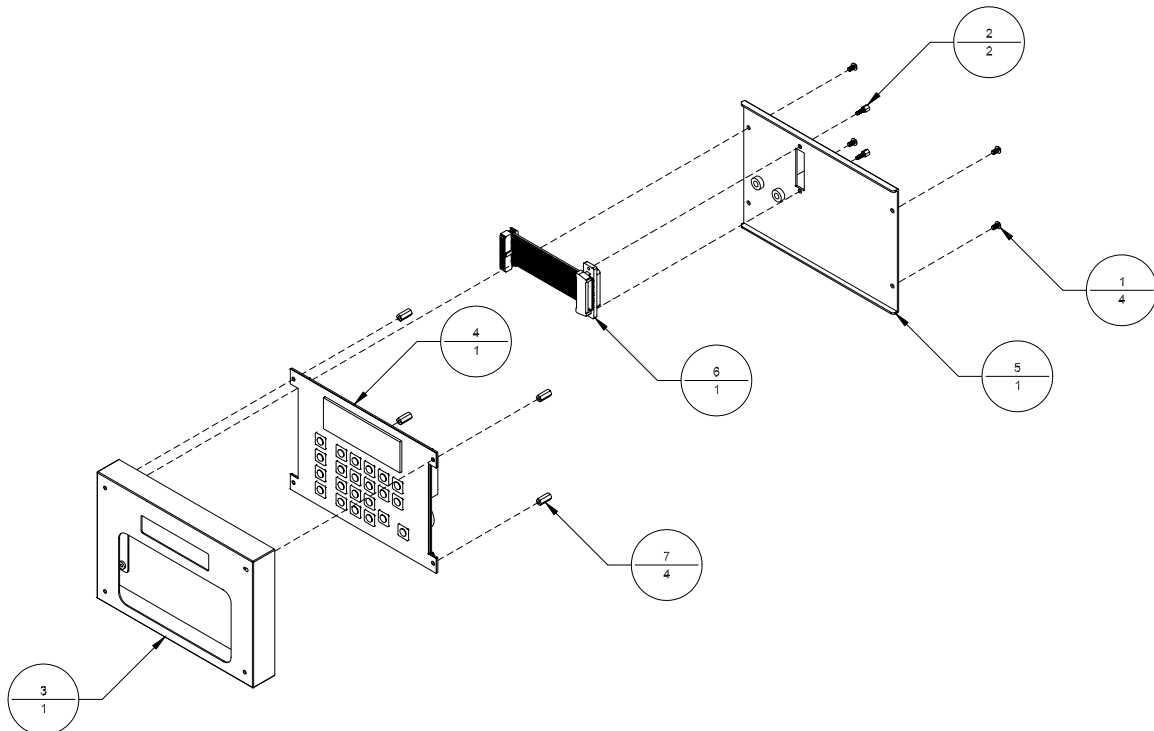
Tabber Keypad Assembly (9101057A)
